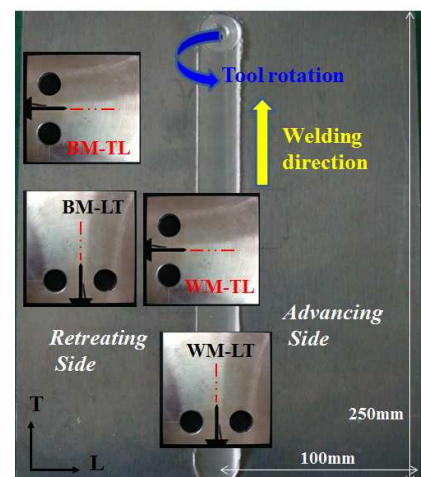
Schematic illustration of specimen cutting for crack orientation
